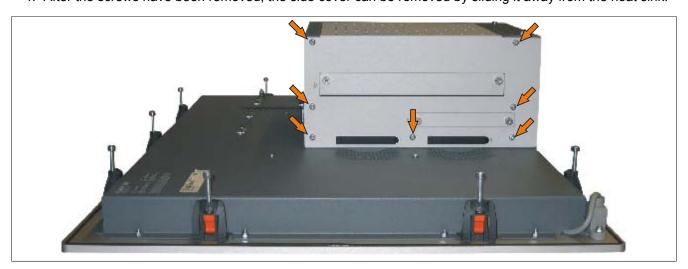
Installing the side cover on a PPC800 with an expansion (1-slot expansion shown in image)
